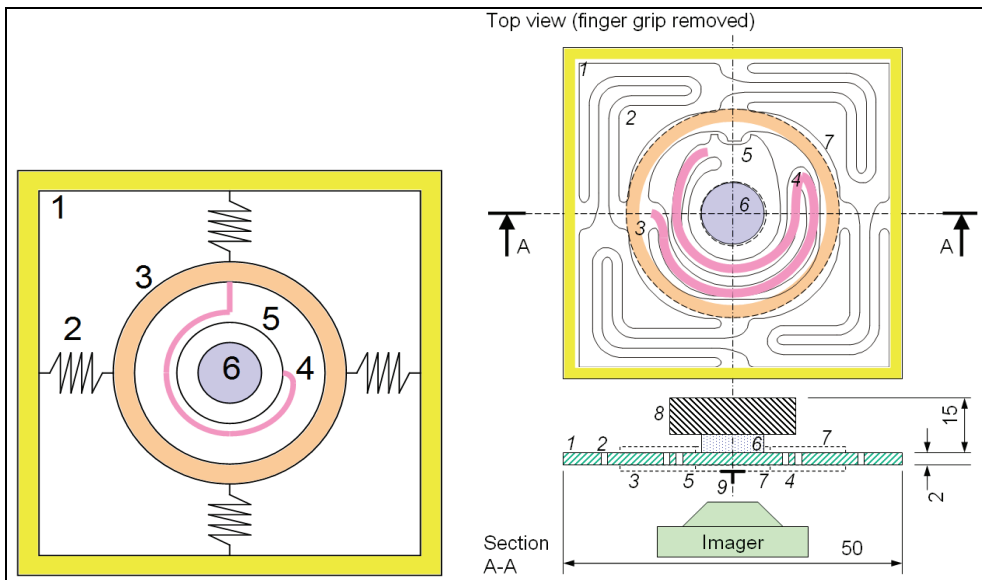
(Left) Abstract model of planar translational-torsion spring mechanism. (Right) Realised design of spring mechanism. 1: outer frame (yellow); 2: outer springs; 3: inner frame (apricot); 4: inner torsion spring (pink); 5: grip mount; 6: grip shaft (light blue); 7: restraining plates; 8: finger grip; 9: index points. Adapted from (Eng 2007).
